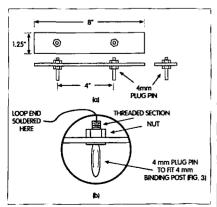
(a) Loop "plug-in" chassis. (b) Plug pin detail.
